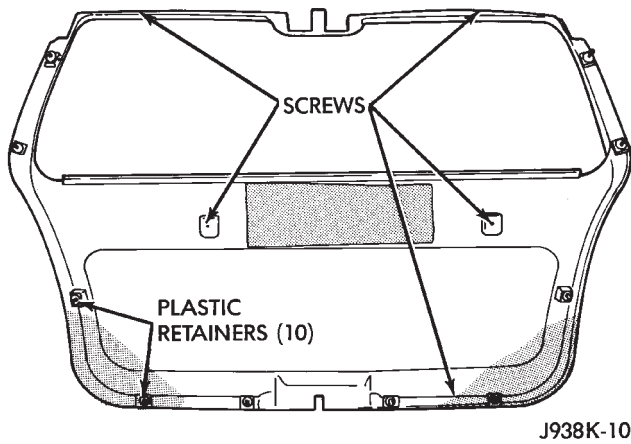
Liftgate Trim Panel Remove To aid in removal of the trim panel, start at the bottom of the panel.
